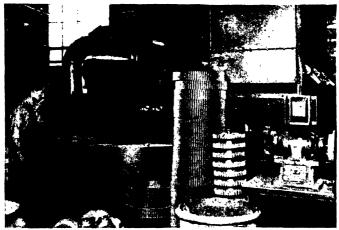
This shows a method used for blast cleaning of heat-treated finished gear rings and other similar parts. Note the compact arrangement of table, abrasive storage tank and operating controls.
